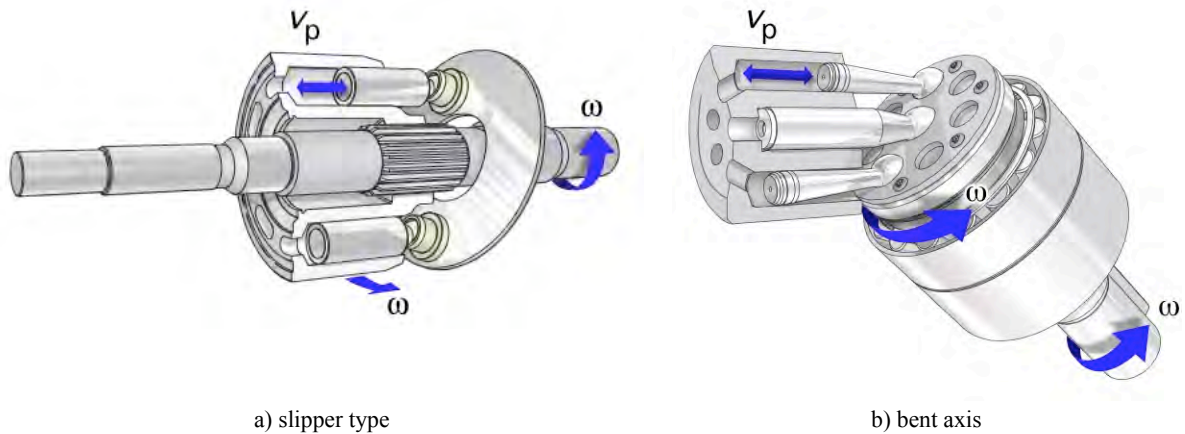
Kinematical principles of current axial piston machines. Only two pistons are shown.
